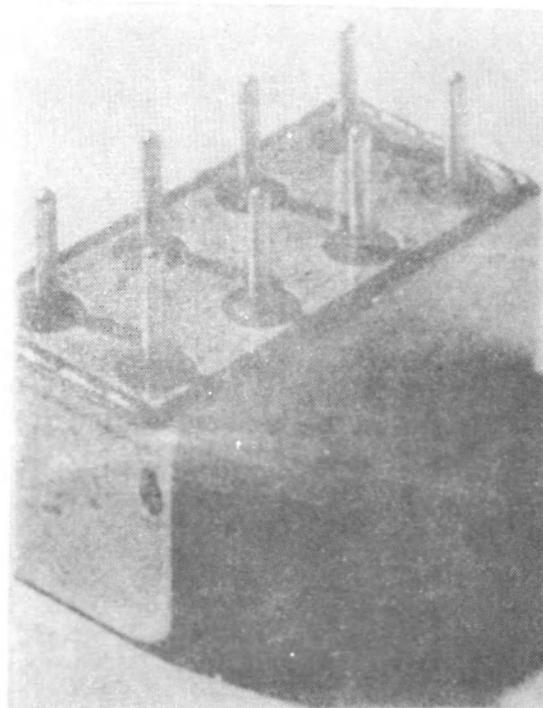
Hermetic seal welding of electrical relay can
